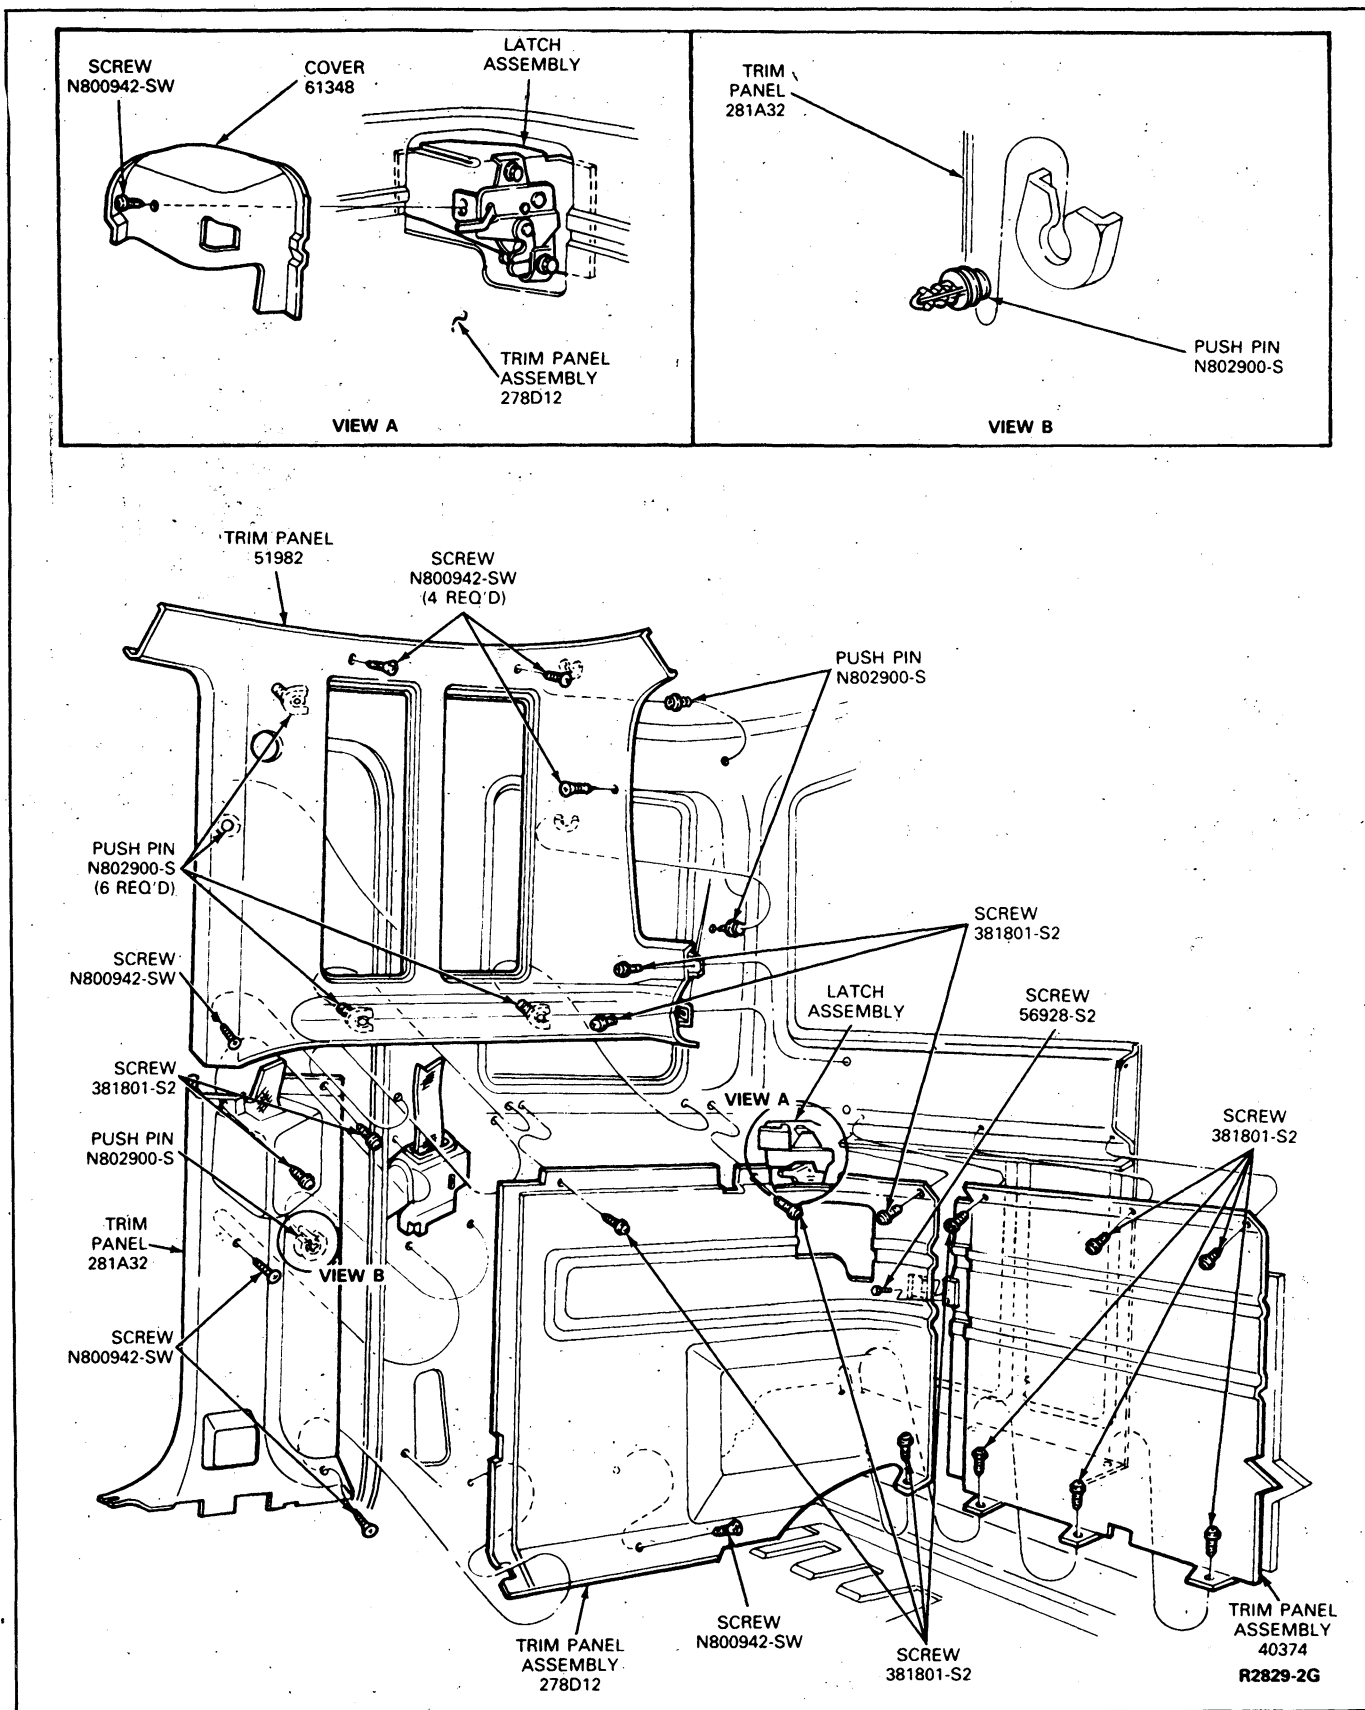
F-150—F-350 Super Cab Body Trim Panels
